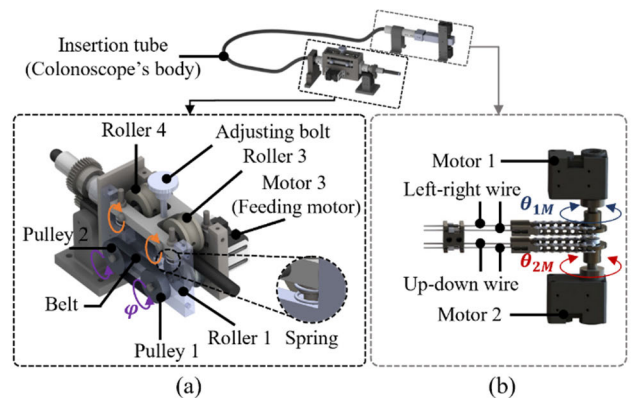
The detailed design of the robotic colonoscopy system (3)-RCS. (a) Feeding mechanism. (b) Steering mechanism.
